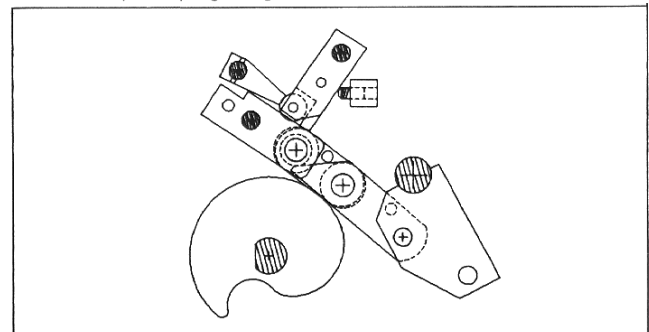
Close Latch Arm Engaging Close Latch Shaft
